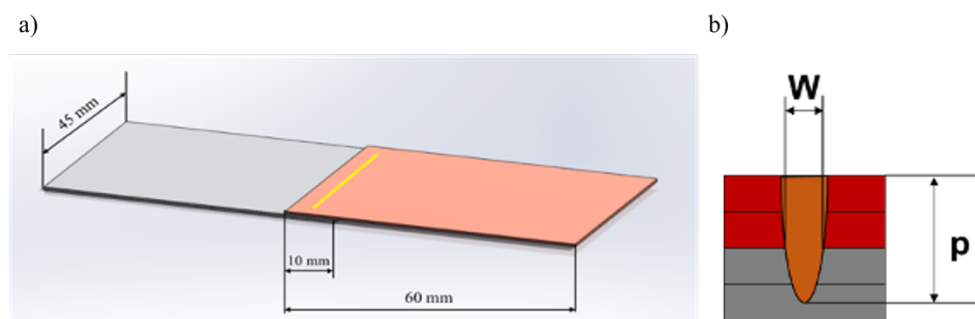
Weld specimen dimensions(a), weld bead characteristics(b)[80].
